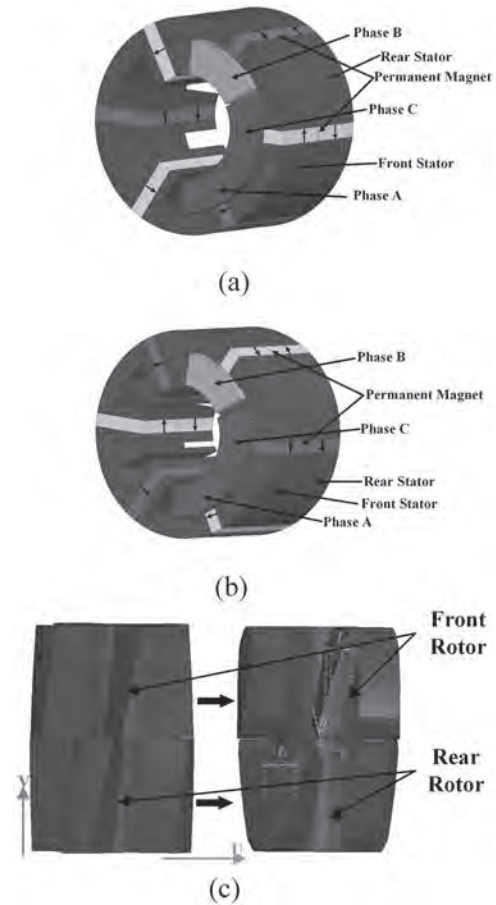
Topology of 6/4 FSPM machines. (a) C-core dual-stator. (b) E-core dual-stator. (c) Design parameters of rotor.
